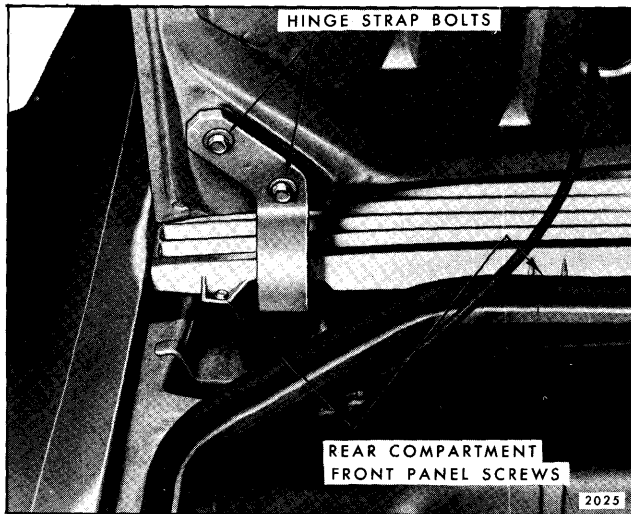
Rear Compartment Front Panel Screws - Oldsmobile and Buick "E" Styles
